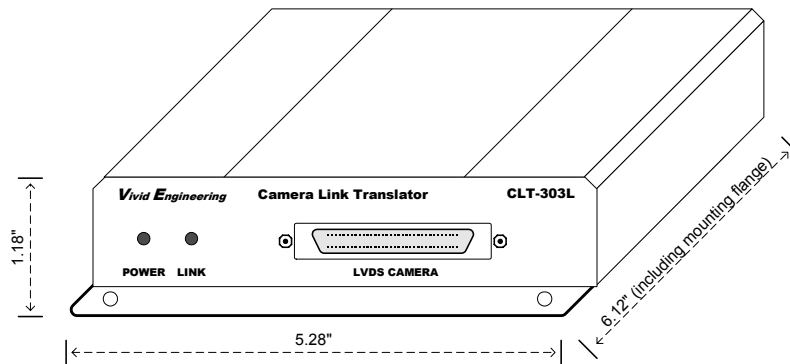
CLT-303L & CLT-303R Cabinet Dimensions
